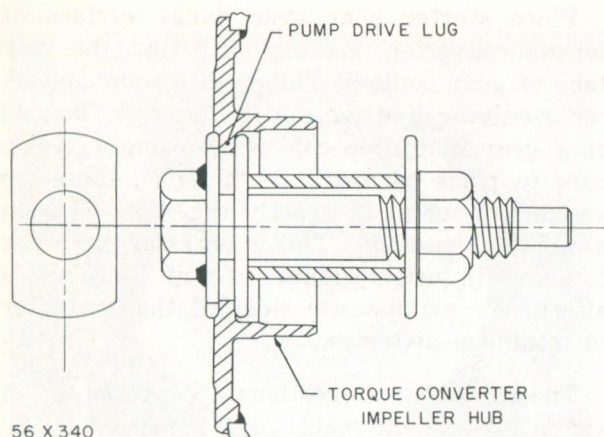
Tool C-3461 Installed in Torque Converter Hub
